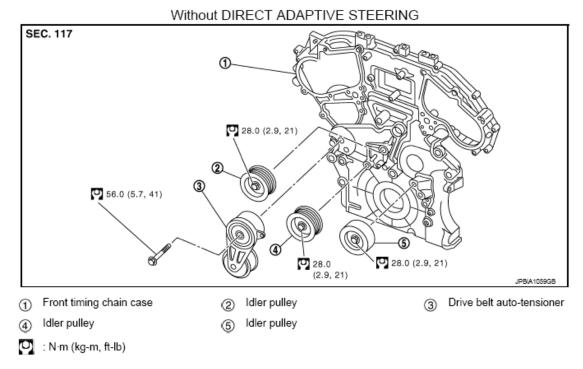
Exploded View Of Drive Belt Auto Tensioner And Idler Pulley With Torque Specifications
